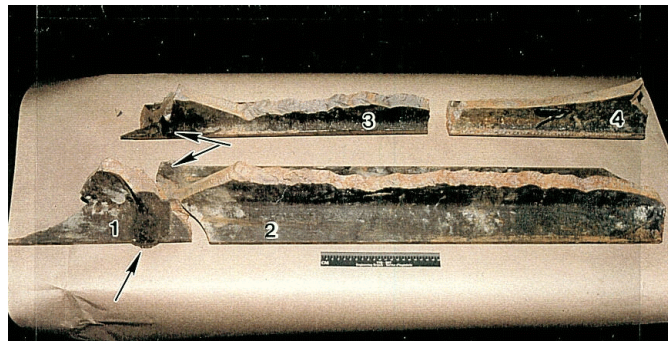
Four pieces of broken rail. Arrows denote location of thermite weld.
